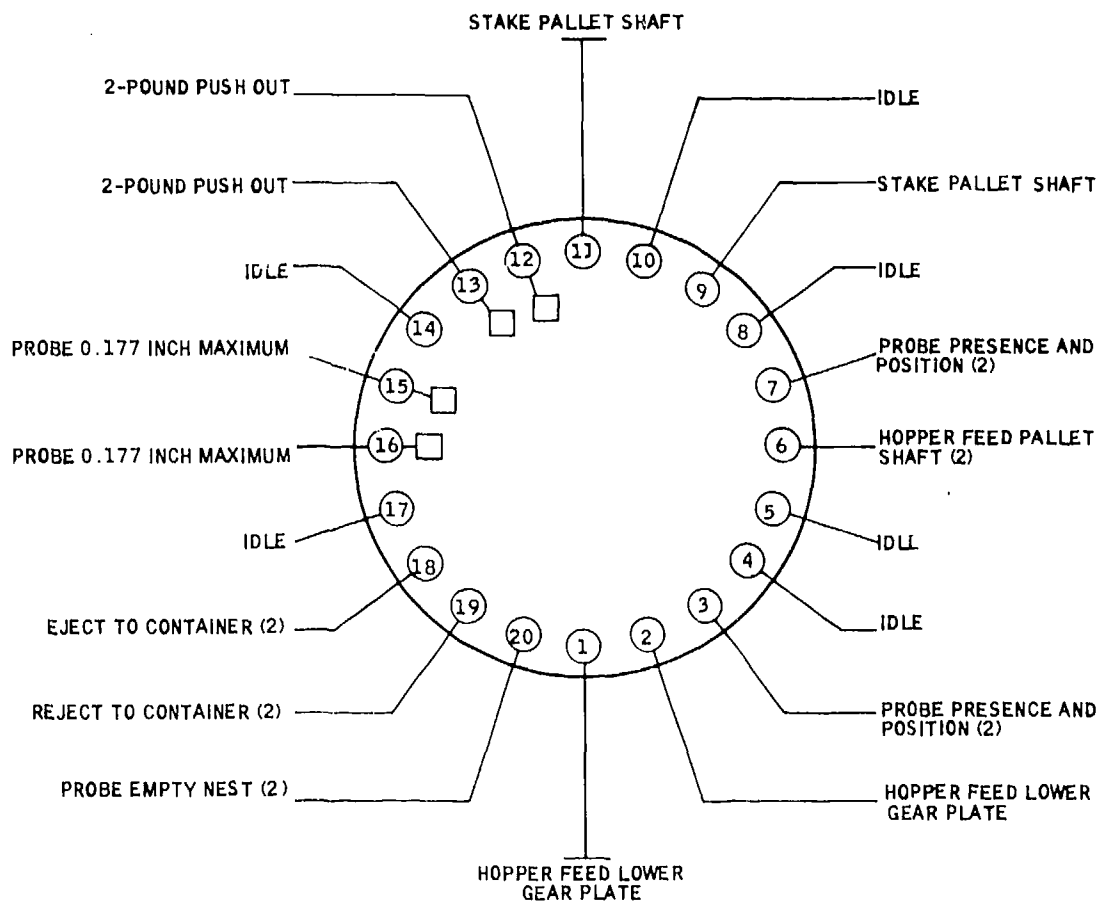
Dial schematic, machine S3 - lower plate and shaft assembly
